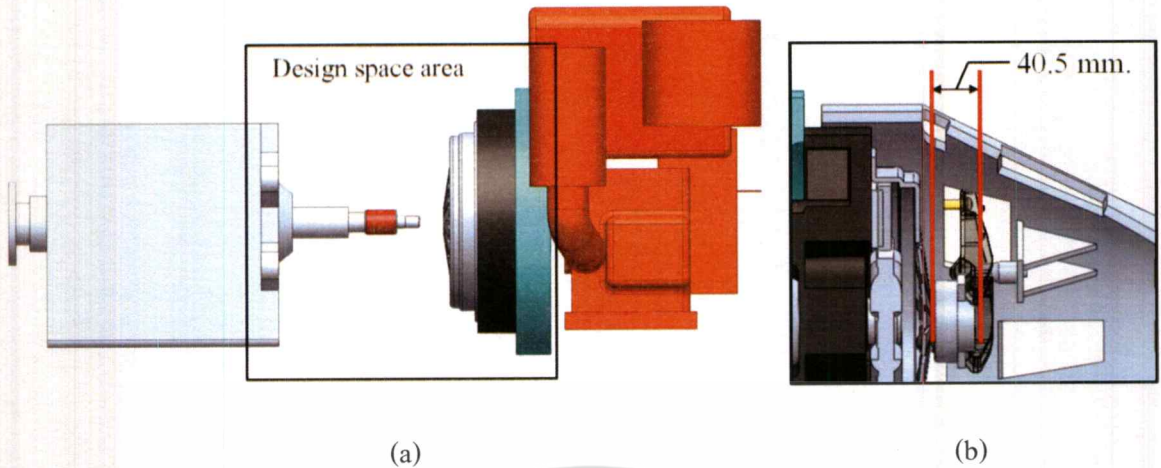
Clutch housing design constraints (a) Design space area (b) Clutch fork mounting pivot distance
